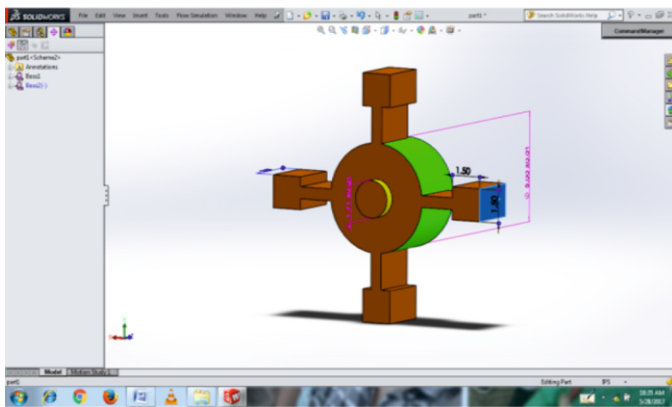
Modelling of rotor shaft, rotor disc, hammer arm and hammer head
